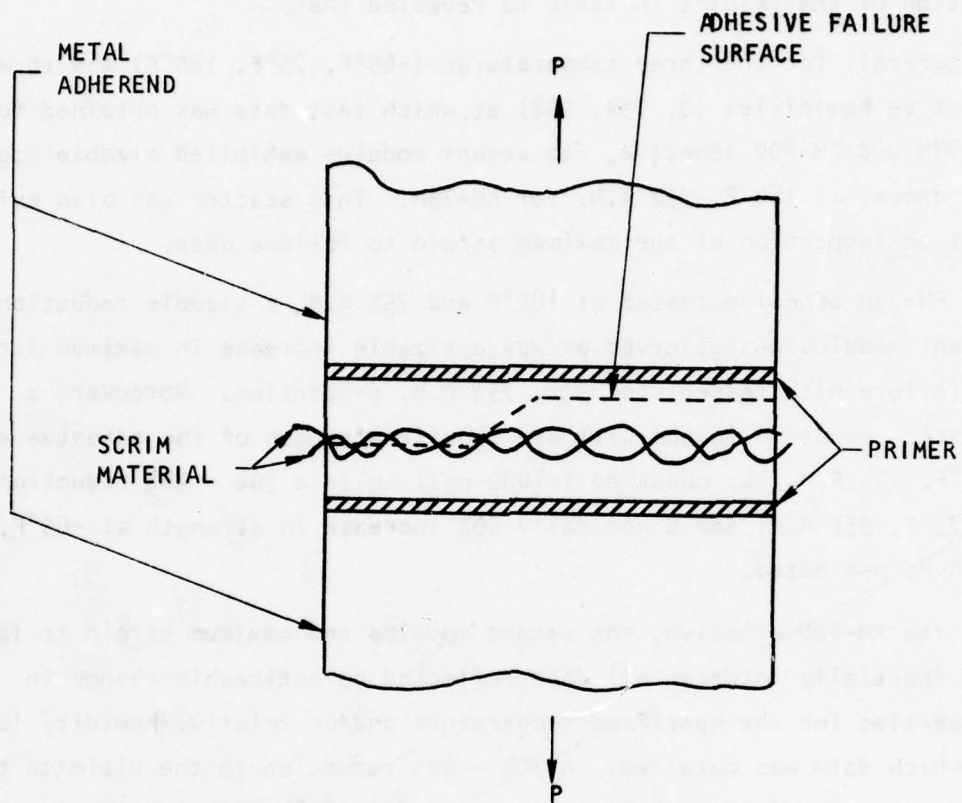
BUTT JOINT ADHESIVE FAILURE PATTERN
